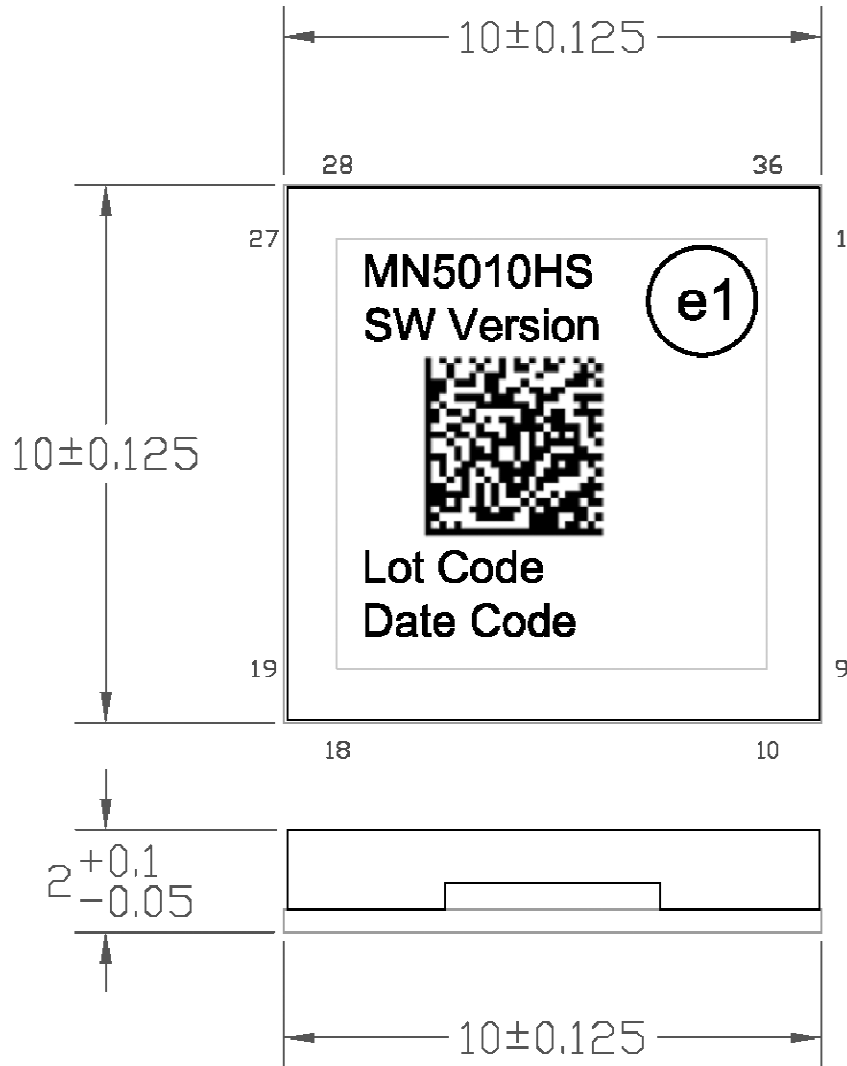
Package Outline & Marking (in mm) : 36-pin LGA
